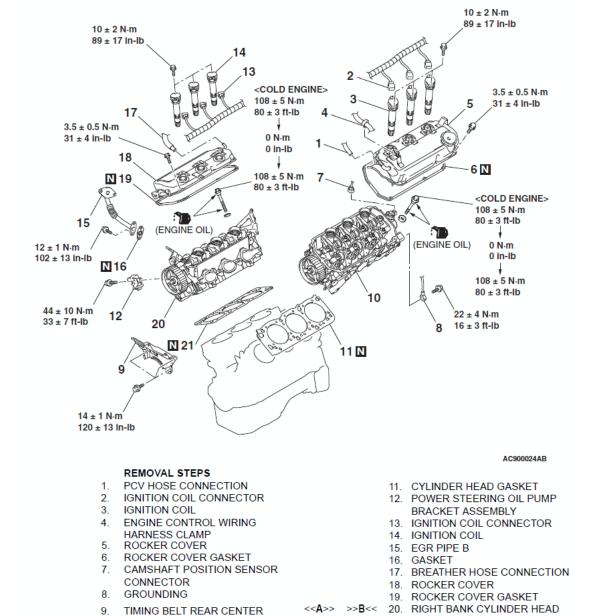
Cylinder Head Components With Torque Specifications Courtesy of MITSUBISHI MOTOR SALES OF AMERICA.
